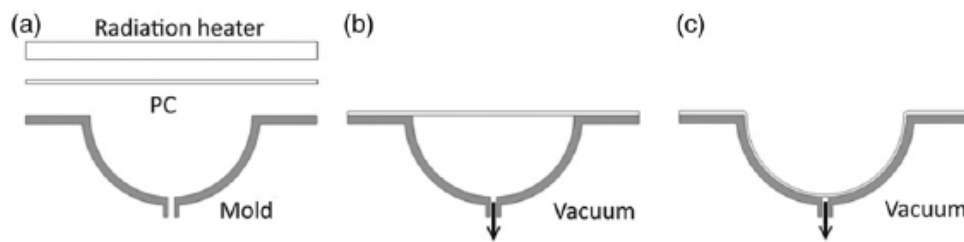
Schematic diagram of vacuum-forming process: (a) sheet heating (b) sheet stretching, and (c) sheet cooling.[6]
